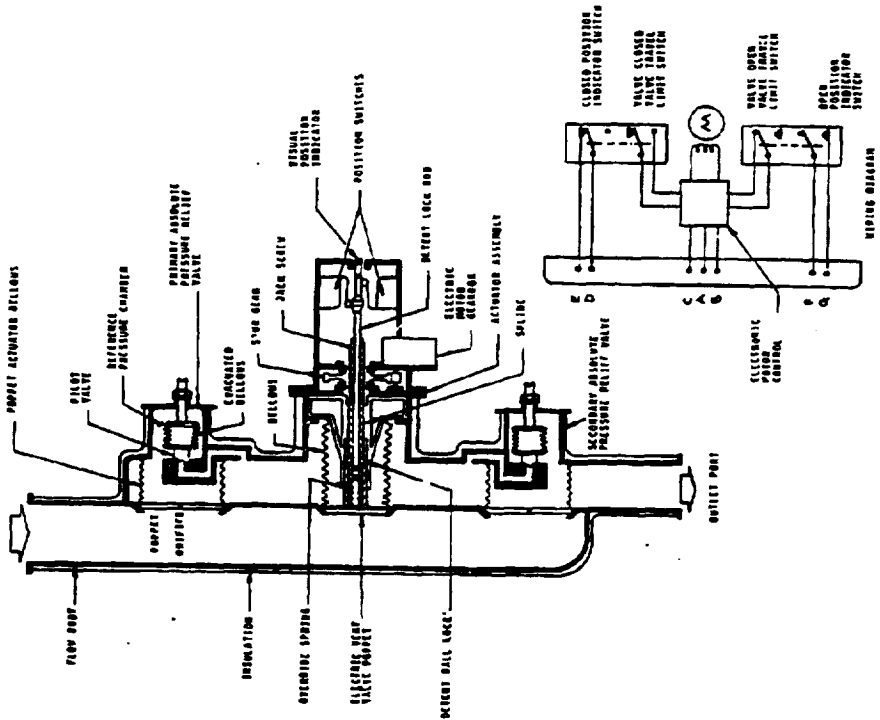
Absolute tank pressure regulator (relief valve and vent valve).
